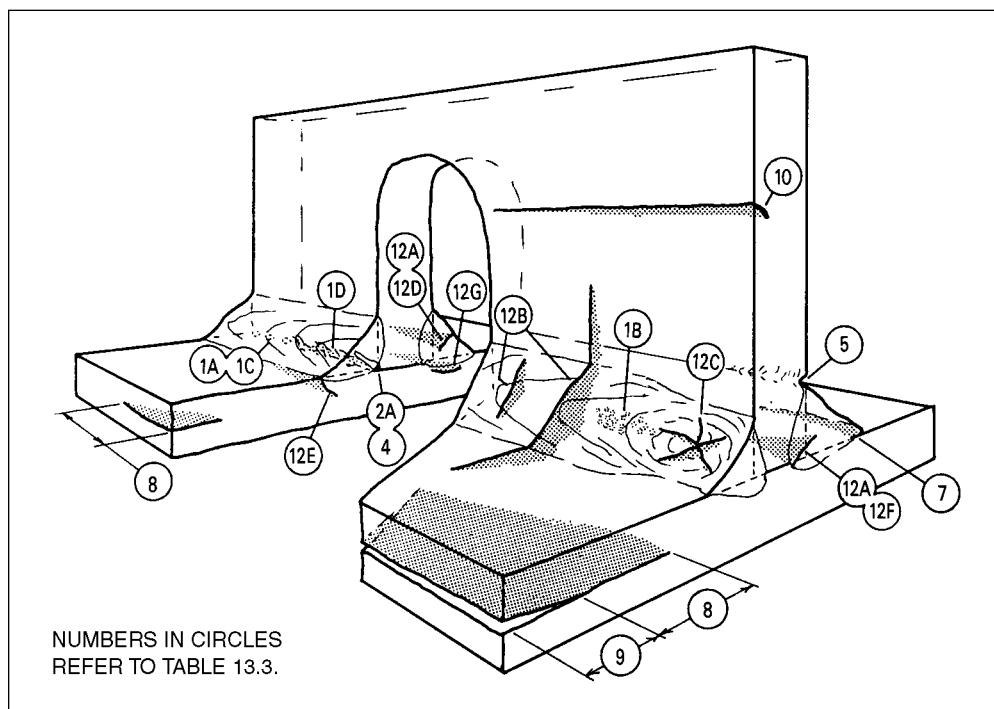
Discontinuities in a Double Fillet Weld in a Lap Joint
